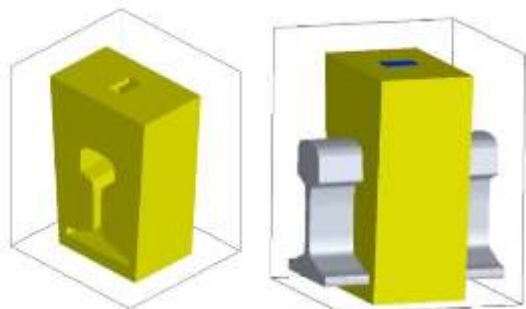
Sand mould used for casting and whole casting model from an angle perspective
